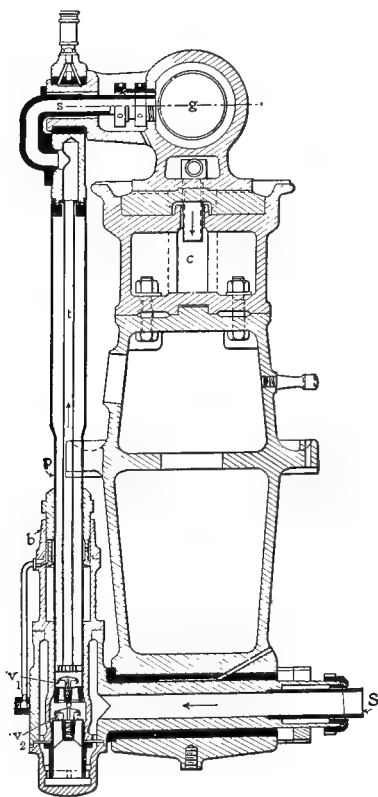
Pumps for Supplying Cooling Water to Piston and Rod.
